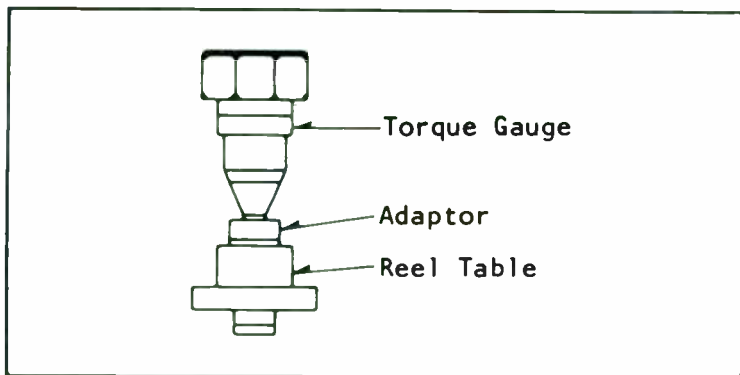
Torque gauge and adaptor (courtesy of Magnavox).
